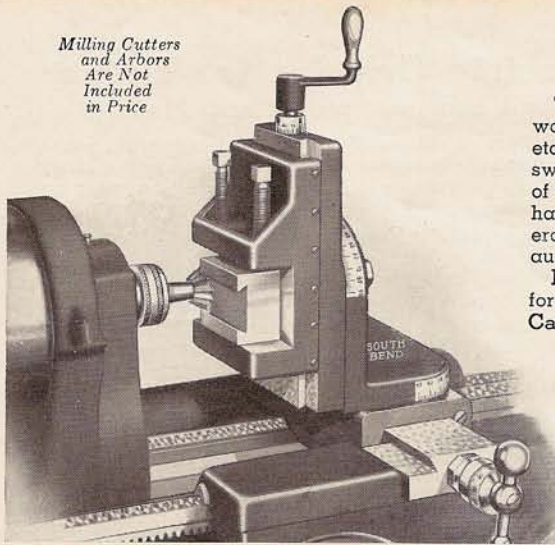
Milling a Dovetail Using the Milling Attachment.
